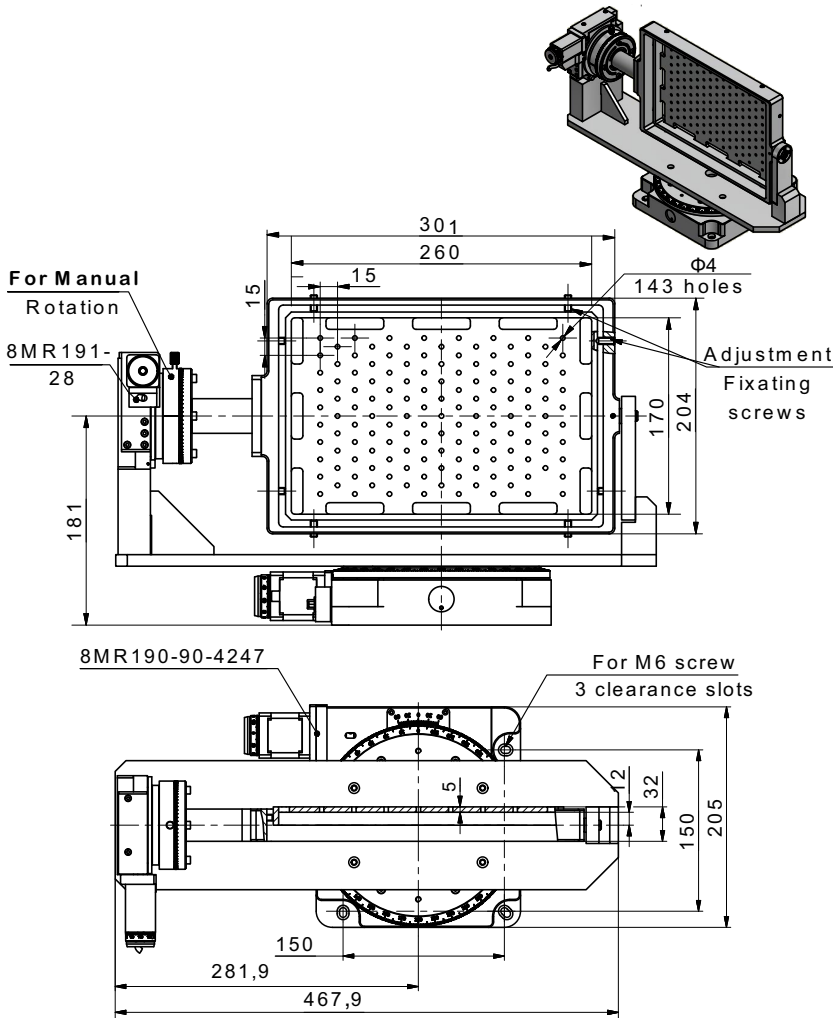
Technical drawing specification of the embedded turn-tilt table. Dimensions are in mm.
